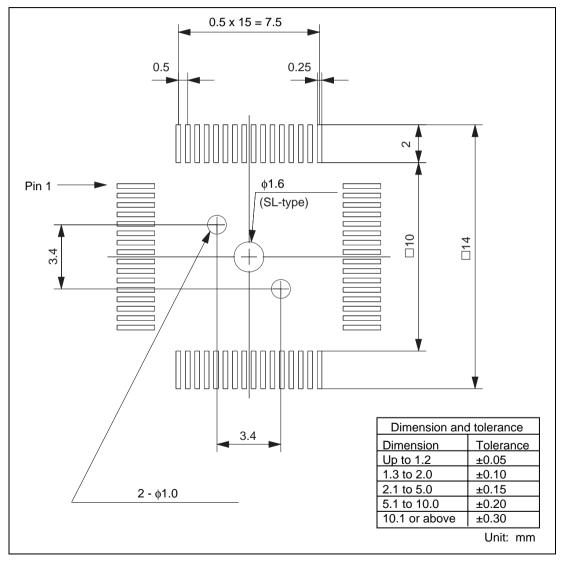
Recommended Dimensions for Mount Pad for PLQP0064KB-A (Former Code: FP-64K)
